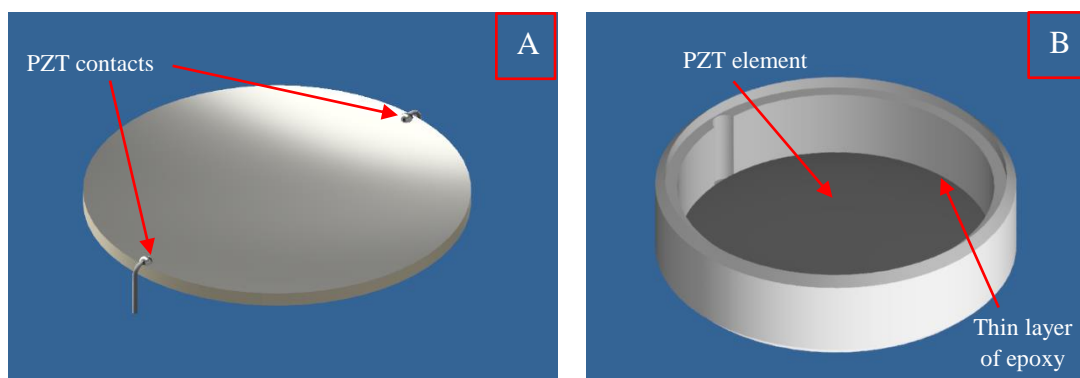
A) Ultrasonic element with the contacts soldered on the top surface. B) The transducer element glued in the ring-shaped structure with a thin layer of epoxy.
